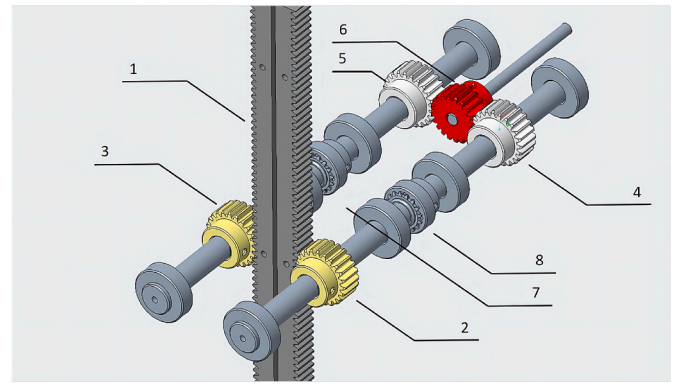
Schematic diagram of the main subcomponents of the gearbox. 1 - rack; 2 - gear I; 3 - gear I; 4 - gear II; 5 - gear II; 6 - gear III; 7, 8 - ratchet.
